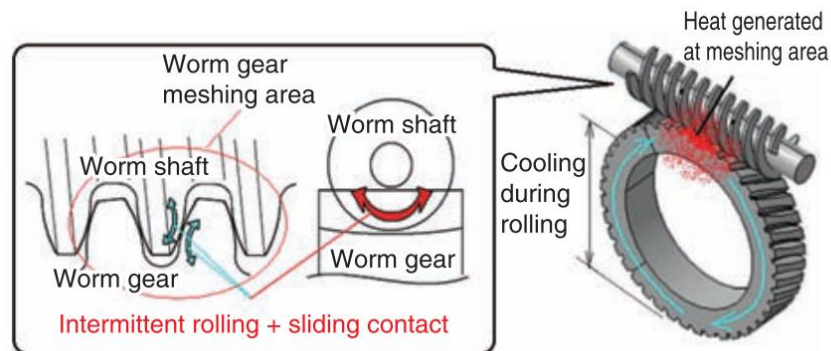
Contact geometry of the polymer worm wheel and steel worm shaft [46].
